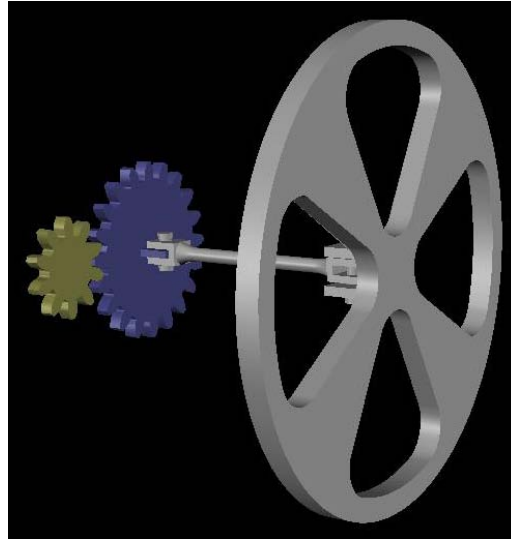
The test assembly built around that drive shaft. The connections between models were built using the shaft model's parametric information. The gear assembly was detailed using a high-level design assistant.
